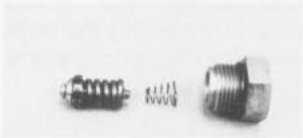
Charge Check and Relief Valve Components (From 87-40)
